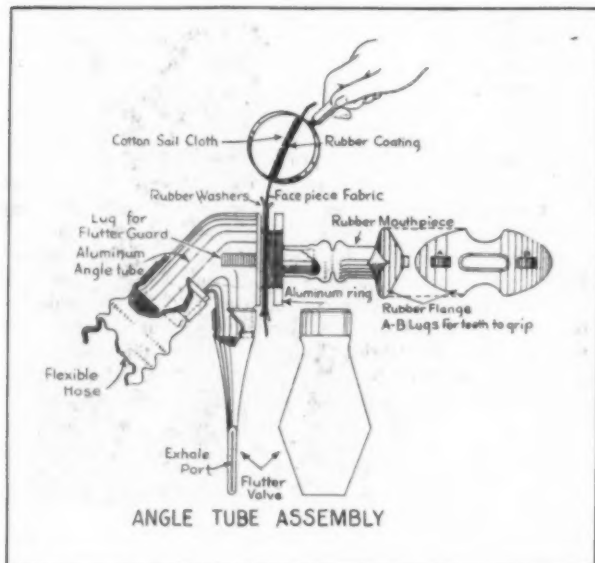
TUBE ASSEMBLY SHOWING RUBBER MOUTH-PIECE, FLUTTER VALVE AND FLEXIBLE HOSE.
